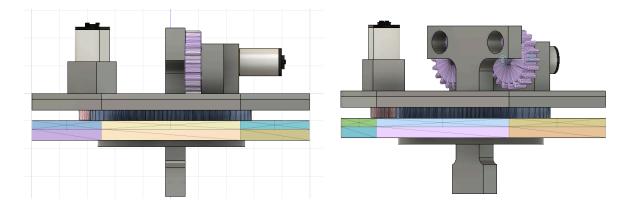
Part 2, T-bar, gears and motors to rotate heads and control the movement of the legs
